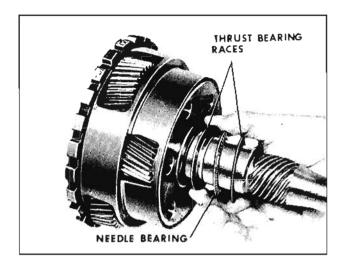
Removing Planetary Gear Thrust Bearing
